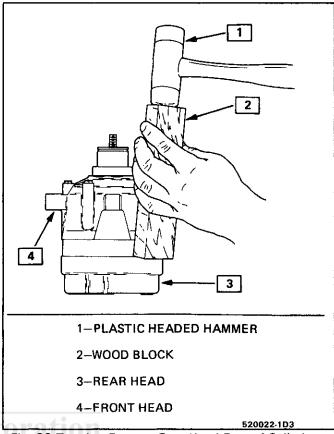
Tapping Front or Rear Head Free of Cylinder
